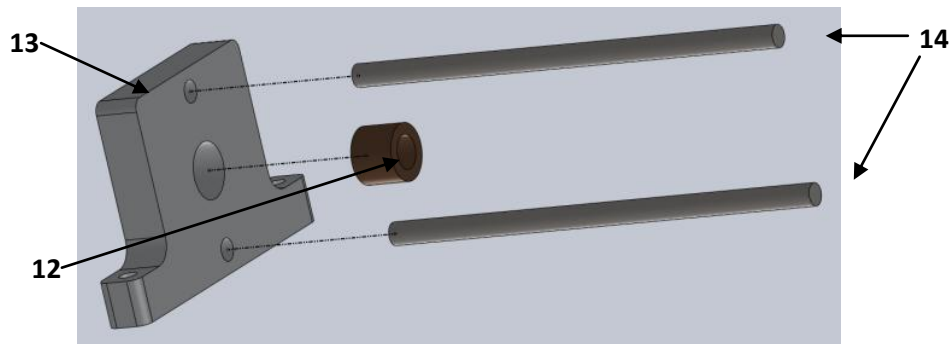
Linear Bearing Support Assembly (D) – (12, 13, 14)
